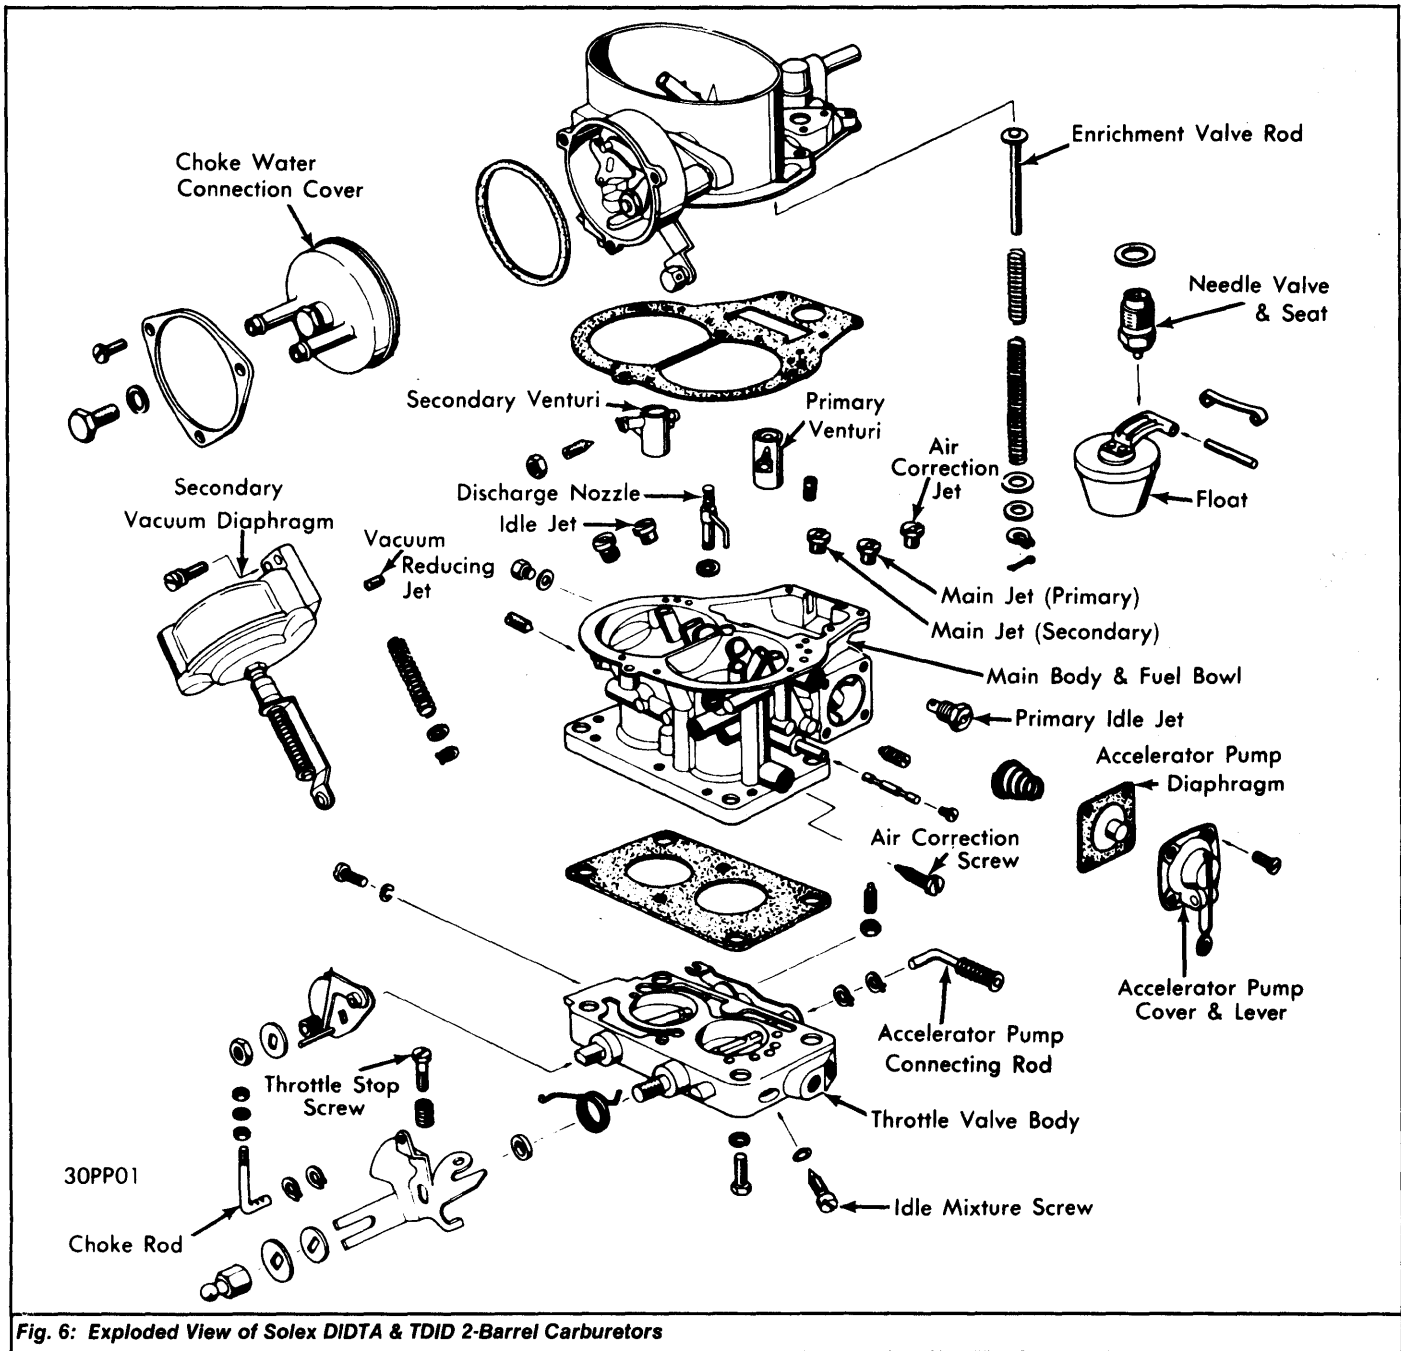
Exploded View of Solex DIDTA & TDID 2-Barrel Carburetors
